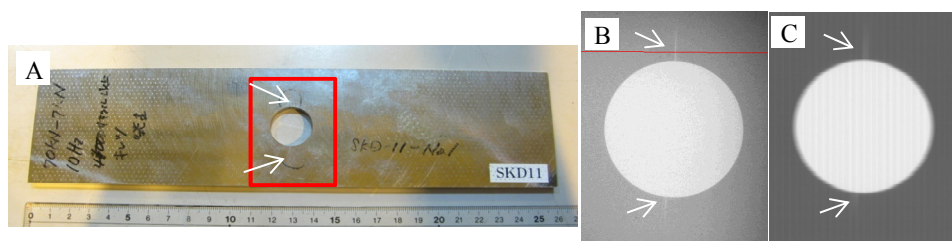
Cracks in stainless steel plate (JIS SKD11, 10mm thick) induced by a tensile fatigue testing machine. Comparison between neutron (B) and X-ray(C) image is pursued.
